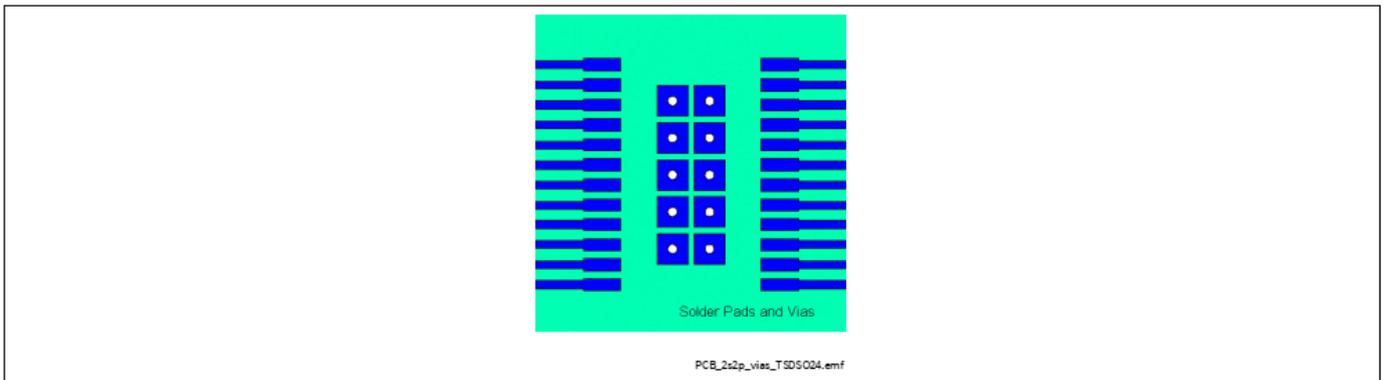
Thermal vias on PCB for 2s2p PCB setup
